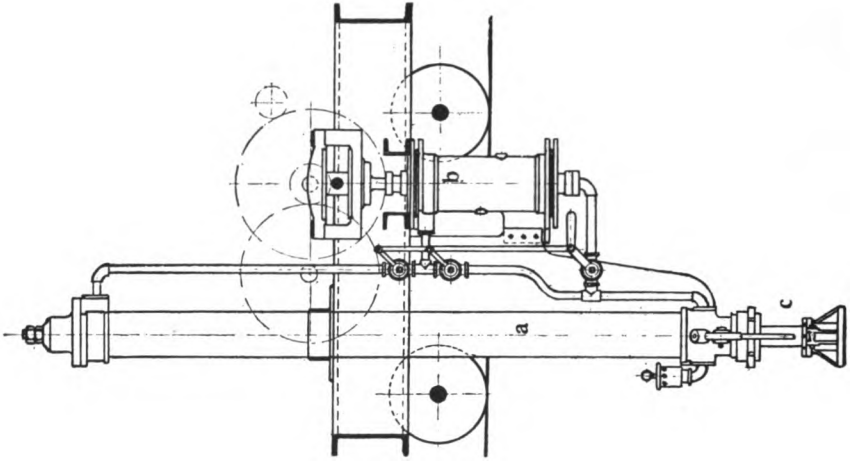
ANOTHER TYPE OF MEGIN STAMPING MACHINE. (Compressed air.)
